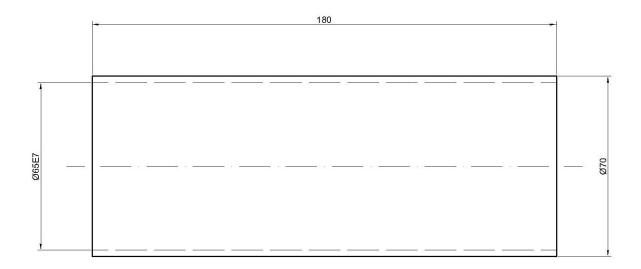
Drawing of the spacer between the gear and bearing A.
